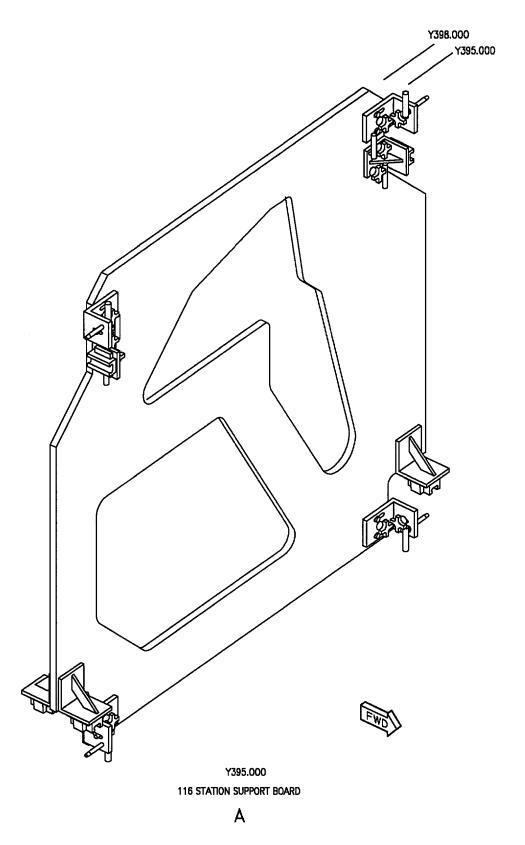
Engine Air Inlet Maintenance Fixture; RE174322020-2 RH (Sheet 2)
